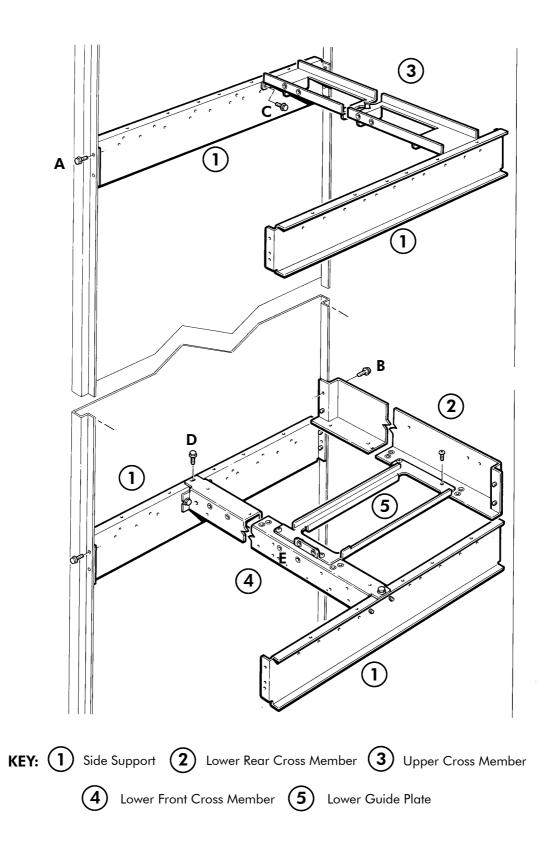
Converteam Q80 Cubicle Dimensions for Module Mounting Frame
